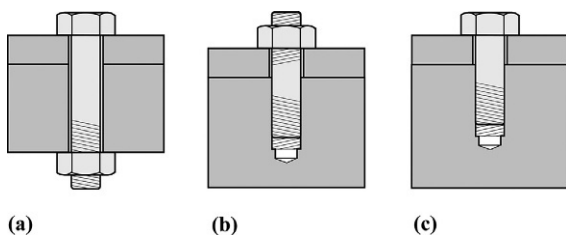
Typical clamping configurations of threaded fasteners. (A) Through bolt, (B) stud, and (C) tap bolt.
